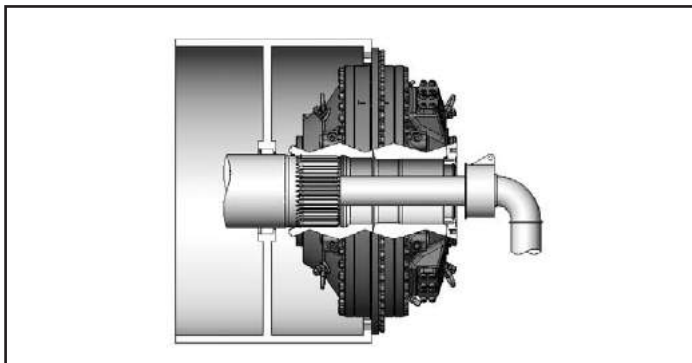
Flange mounted motor with splines and through hole for cooling of the driven machine.
